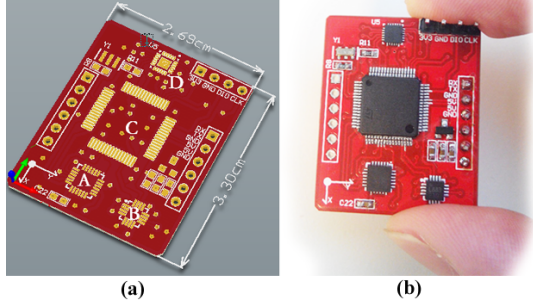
(a) PCB of AHRS and (b) Appearance of fabricated AHRS (Own pictures).
